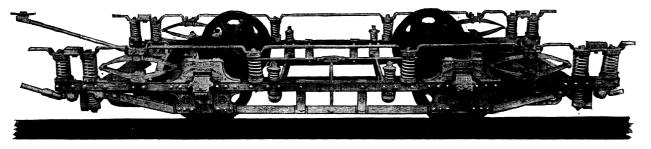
"Peckham" Extra-Long Cantilever Extension Motor Truck.
